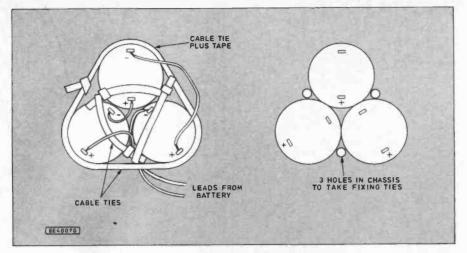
Method of fixing cells. A cable tie and tape are used to bind the cells together and three cable ties are used to hold the battery to the chassis. Solder the wires to the cells before attaching to chassis, finally cover terminals with insulating tape.
